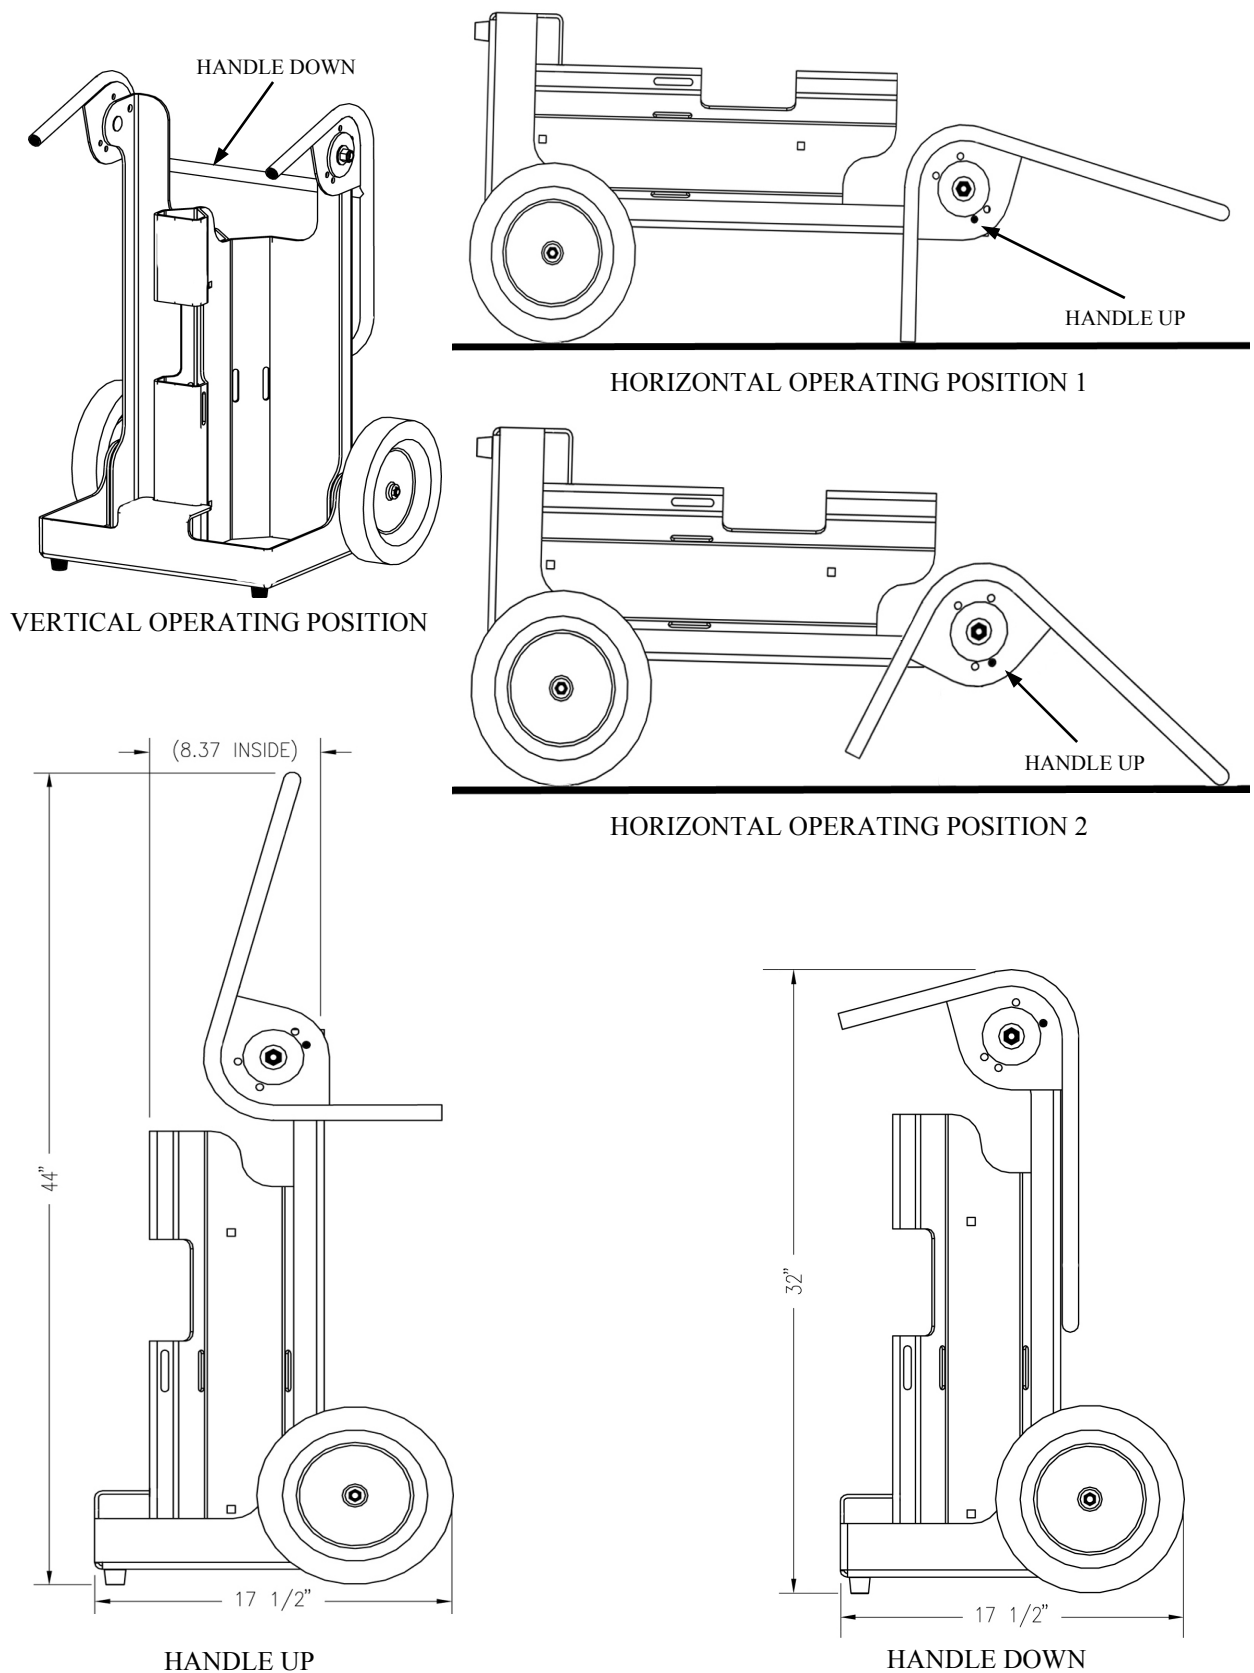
Working Air Cart Without Air Cylinders or Pneumatic Assembly
